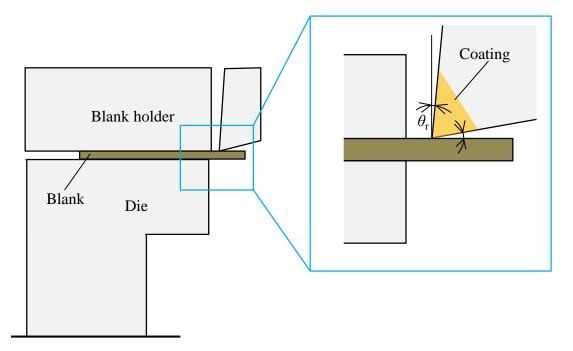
Trimming using punch with relief angle and coated tips.
